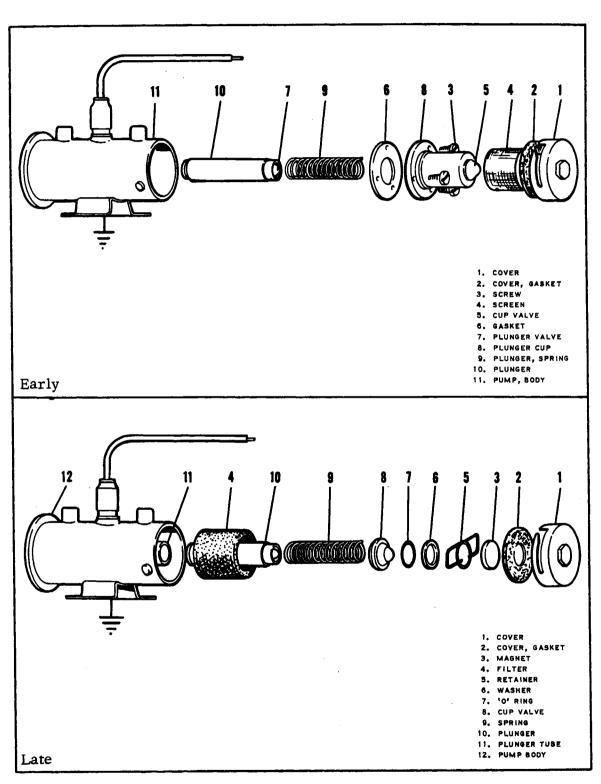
Bendix Electric Fuel Pumps (Early and Late)
